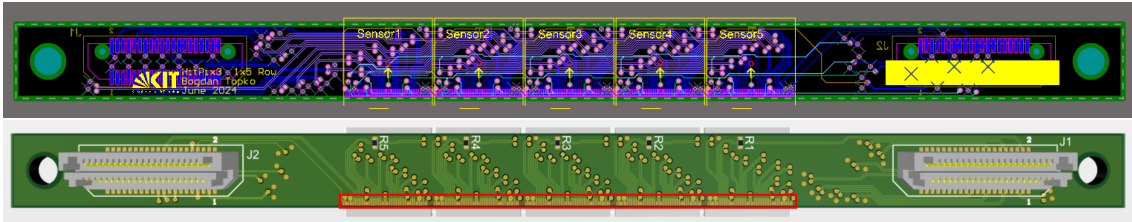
1×5 strip PCB layout (top) and 3D render of the bottom view (bottom). The red box outlines the PCB bonding pads in the 3D render.
